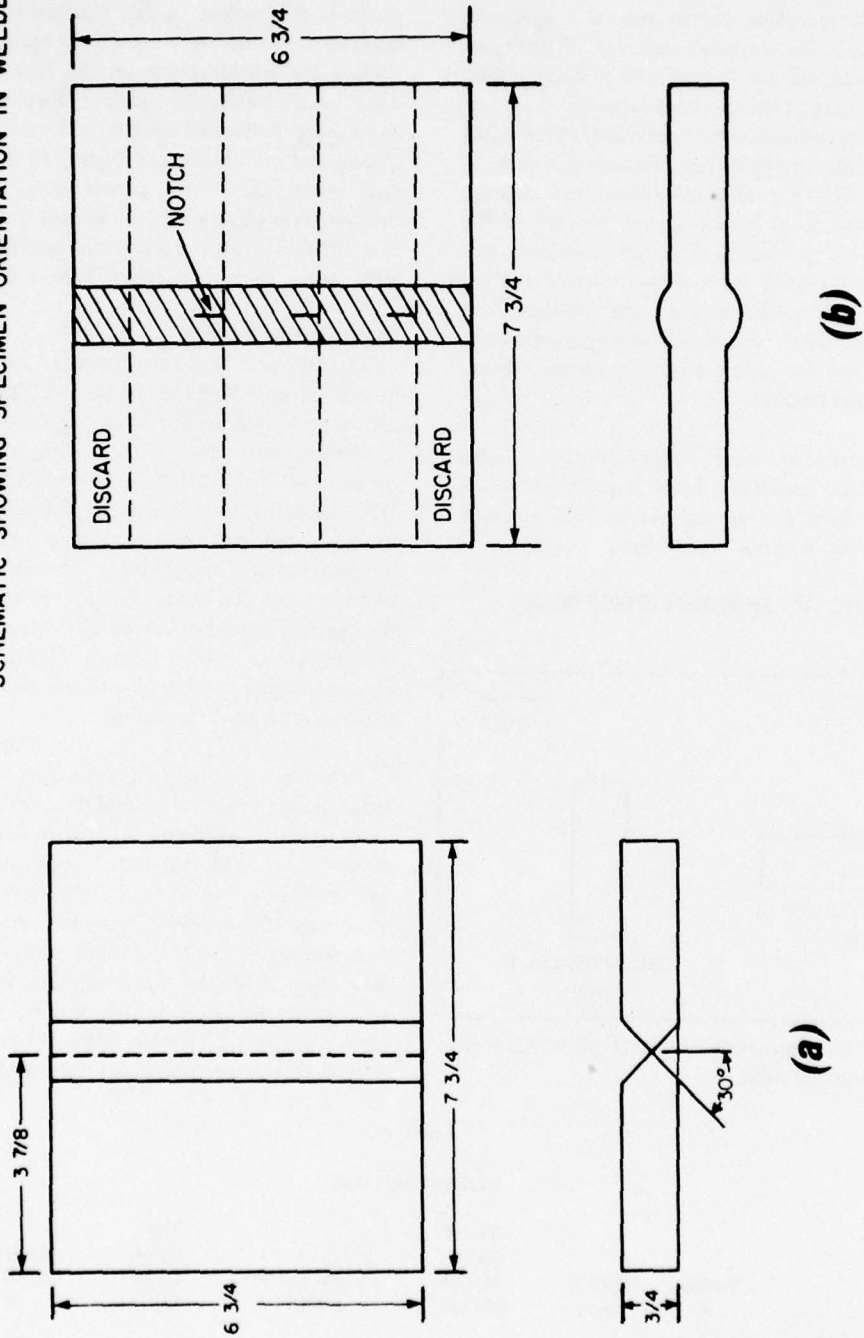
Weld specimen preparation blank showing (a) V-groove preparation and (b) specimen orientation. (All dimensions are in inches; metric conversion factor: 1 in. = 2.54 cm.)
